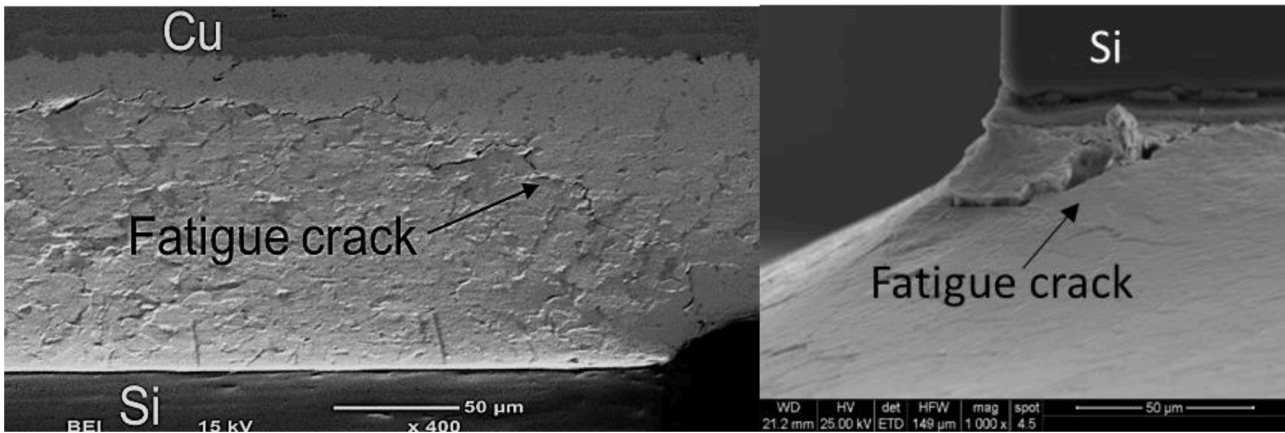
Left: Crack at the periphery of a PbSnAg solder joint. Right: Crack at the corner of an SnSbAg solder joint.
